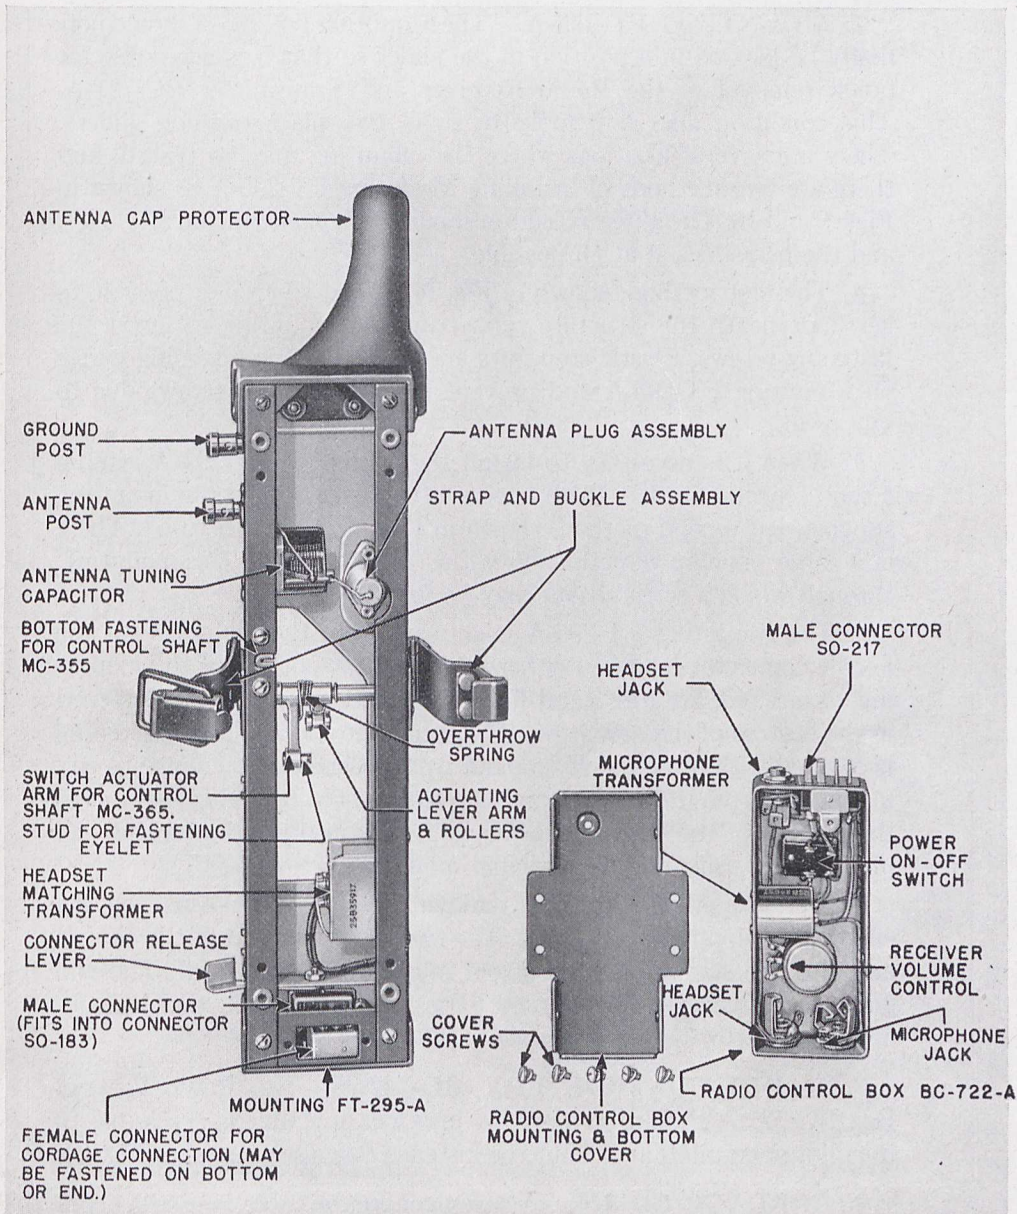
MOUNTING FT-295-A AND RADIO CONTROL BOX BC-722-A (BOTTOM VIEW)
